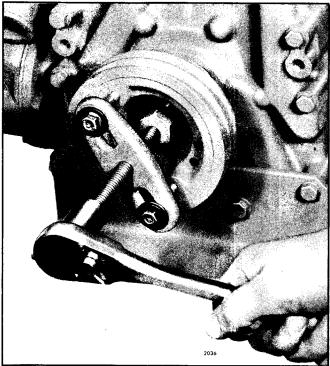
Removing Crankshaft Pulley Using Puller J 24420-A
